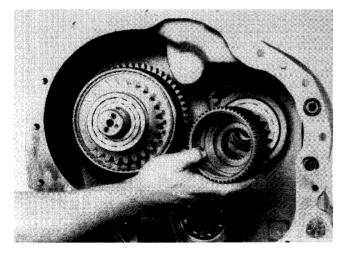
Position 2nd clutch disc hub on clutch shaft.
